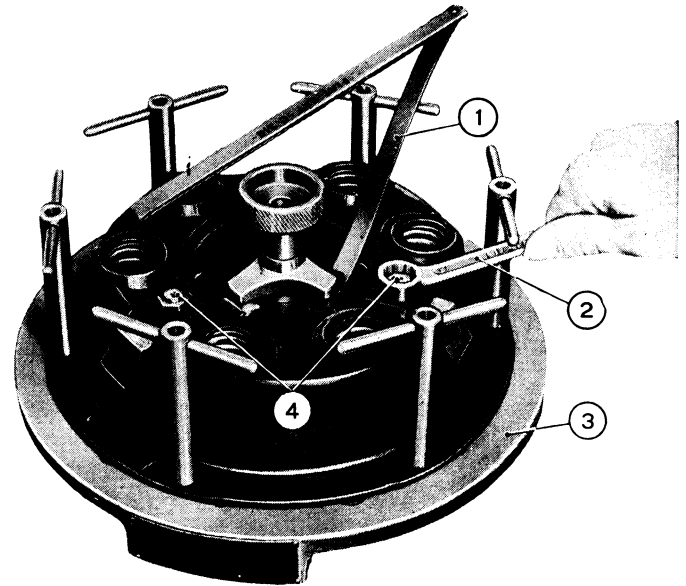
Adjusting height of clutch release levers on tool A. 70015.
